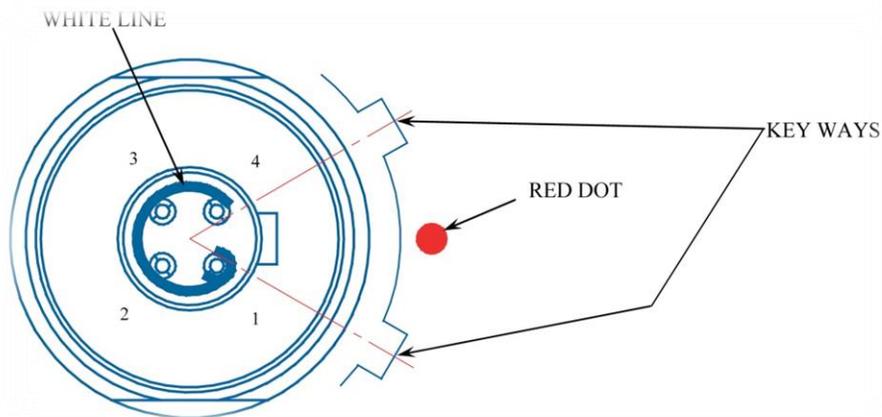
Rear View of LEMO socket EGB00304CLL. (This is the view of the solder buckets and the red dot marker and key way positions indicated for clarity.)
